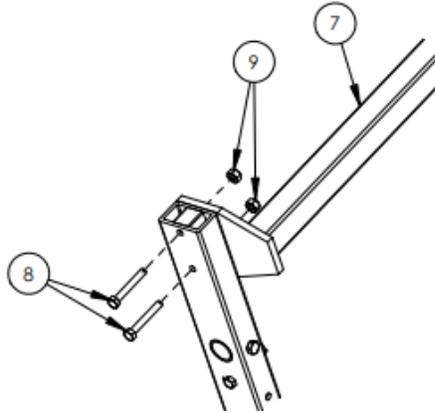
Installing Stabilizer Bar to Extension Arms
